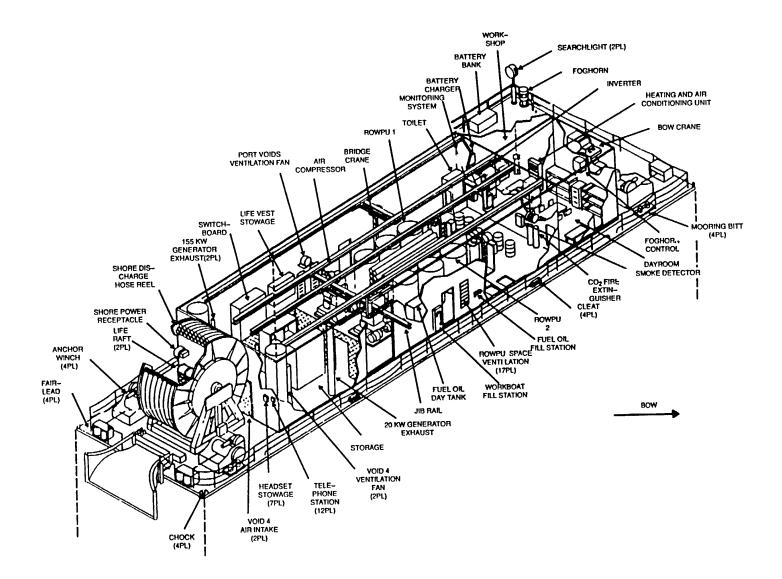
Major Components of ROWPU Barge Systems and Equipment - Deckhouse (Sheet 2 of 3)
